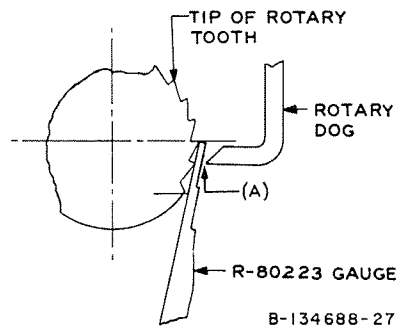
Illustrating Requirement for Clearance Between Rotary Dog and Rotary Tooth
